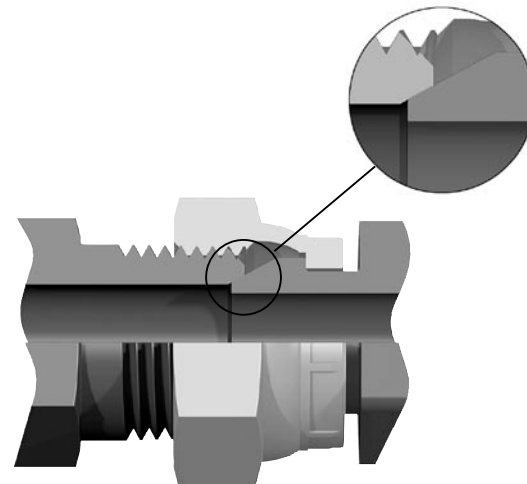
Illustration showing how NPSM swivel adapters seal on mating chamfer in male pipe thread
